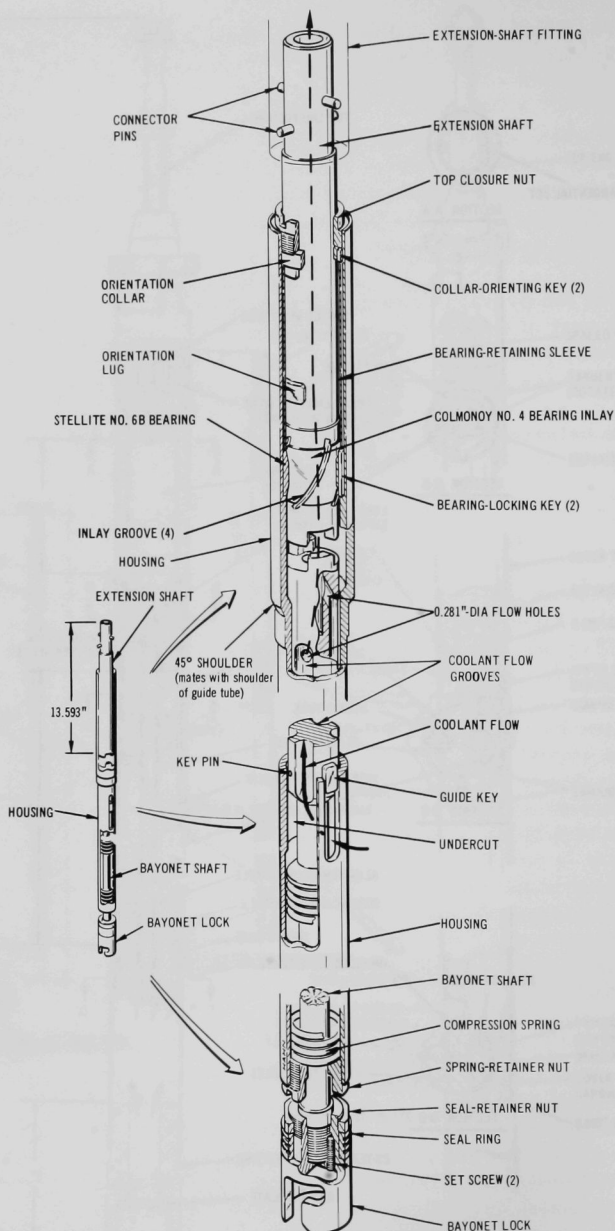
Lower-bearing and Bayonet-lock Subassembly of Mark IIB Oscillator Rod
